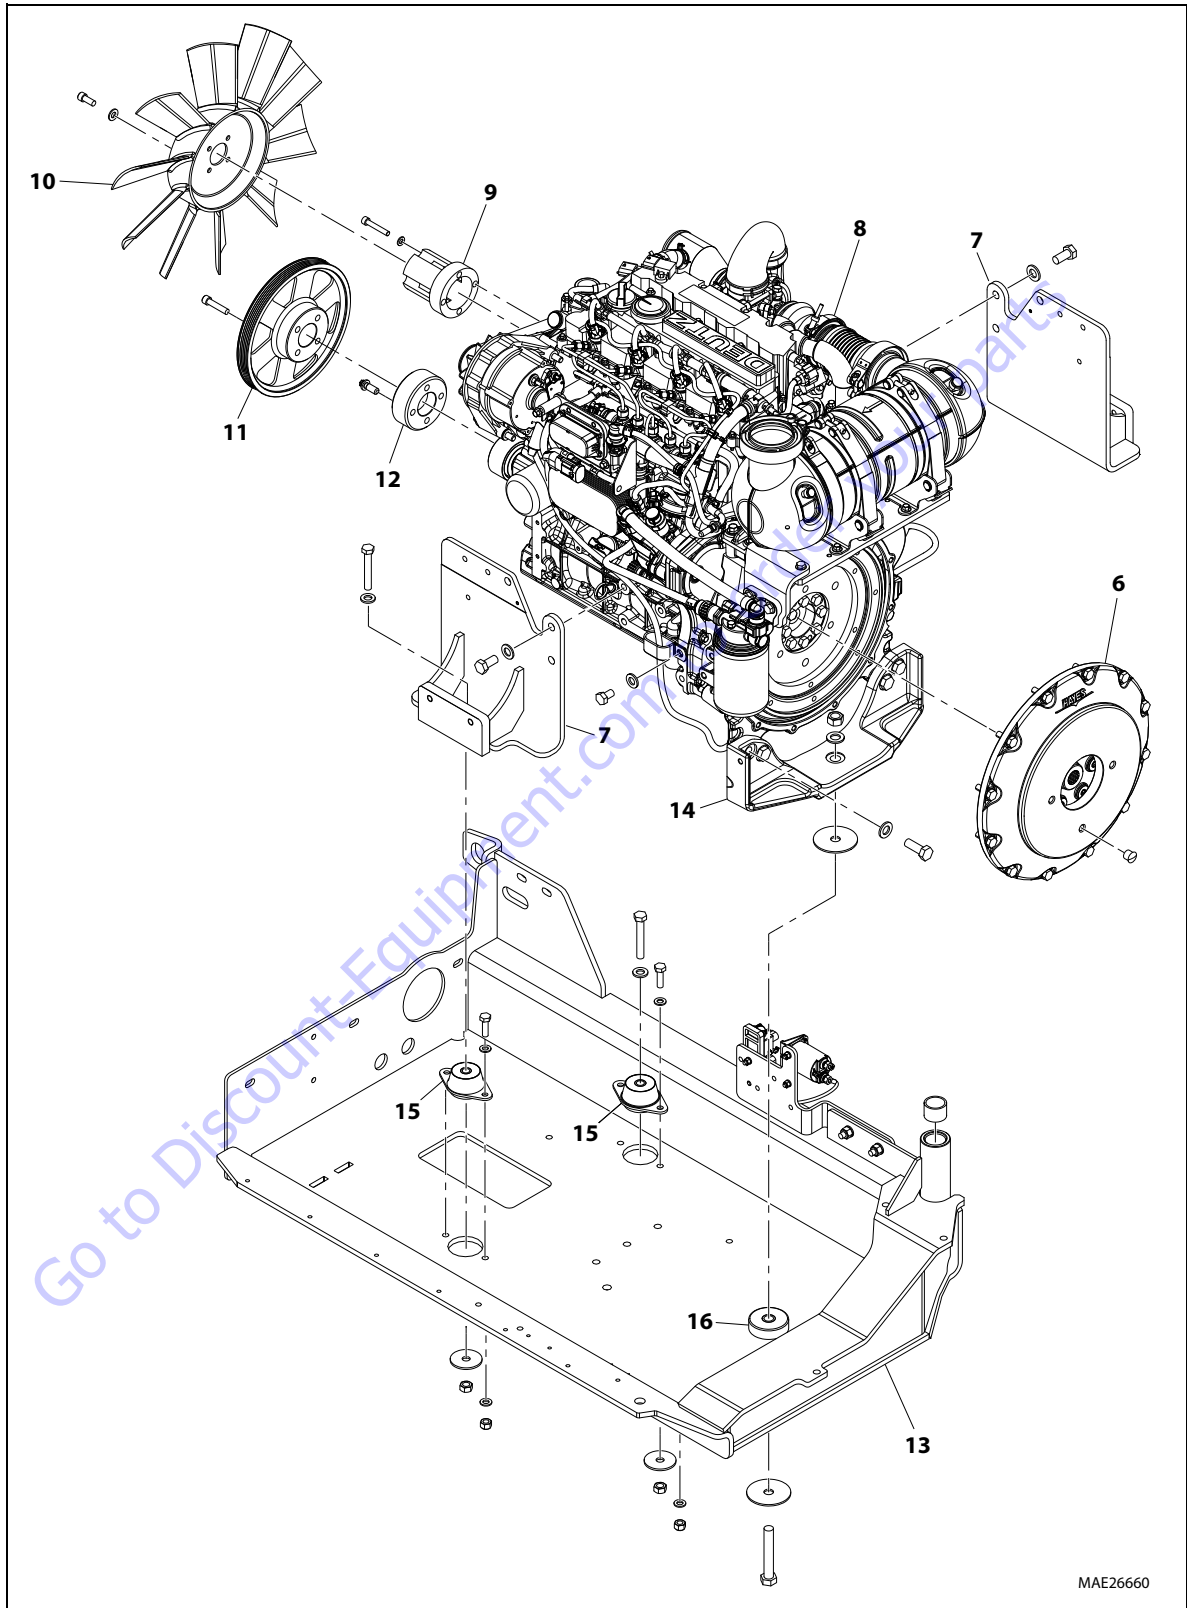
Deutz TD2.9 L4 Engine Assembly - Sheet 2 of 2
